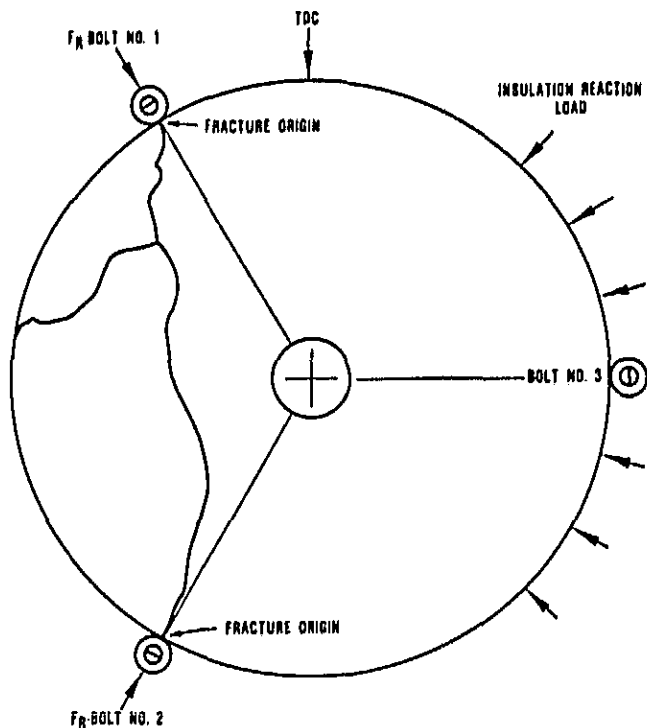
Inner Diffuser Housing Fracture (Structures Rig Build 10).
